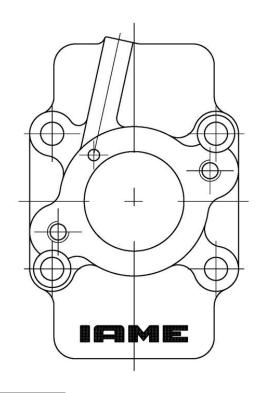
PHOTO IDENTIFICATION CARBURETTOR INLET CONVEYOR
